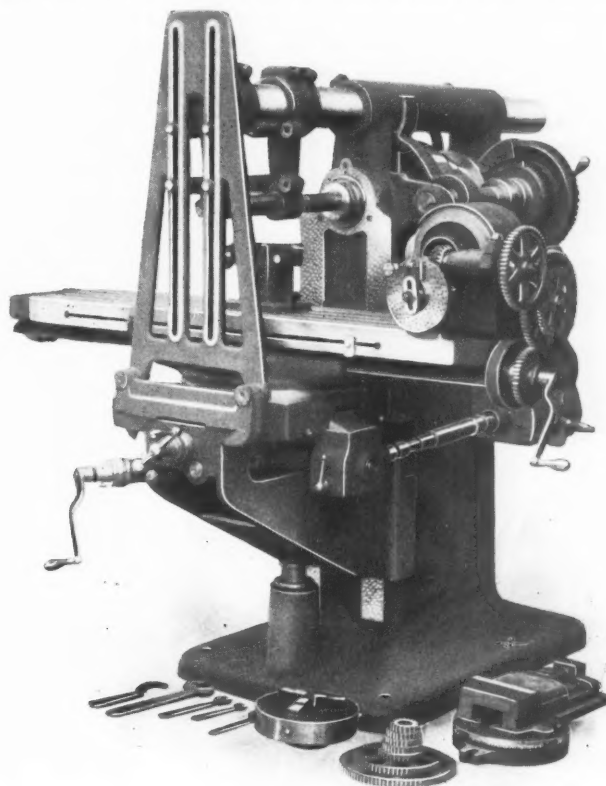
Le Blond No. 3 Universal Milling Machine.
